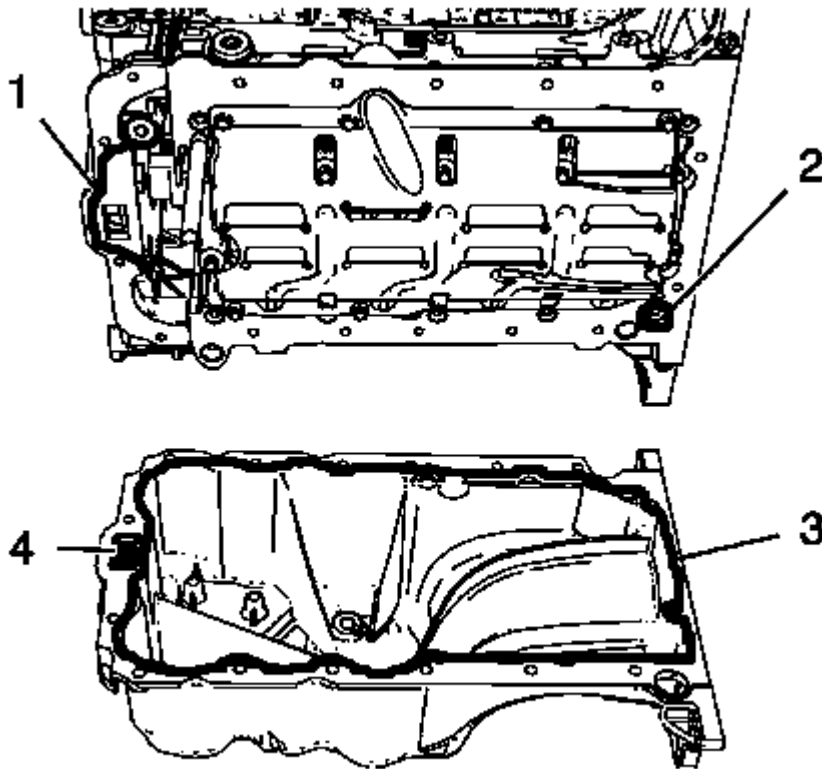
Engine Front Cover, Oil Suction Gallery And Screw Bore
